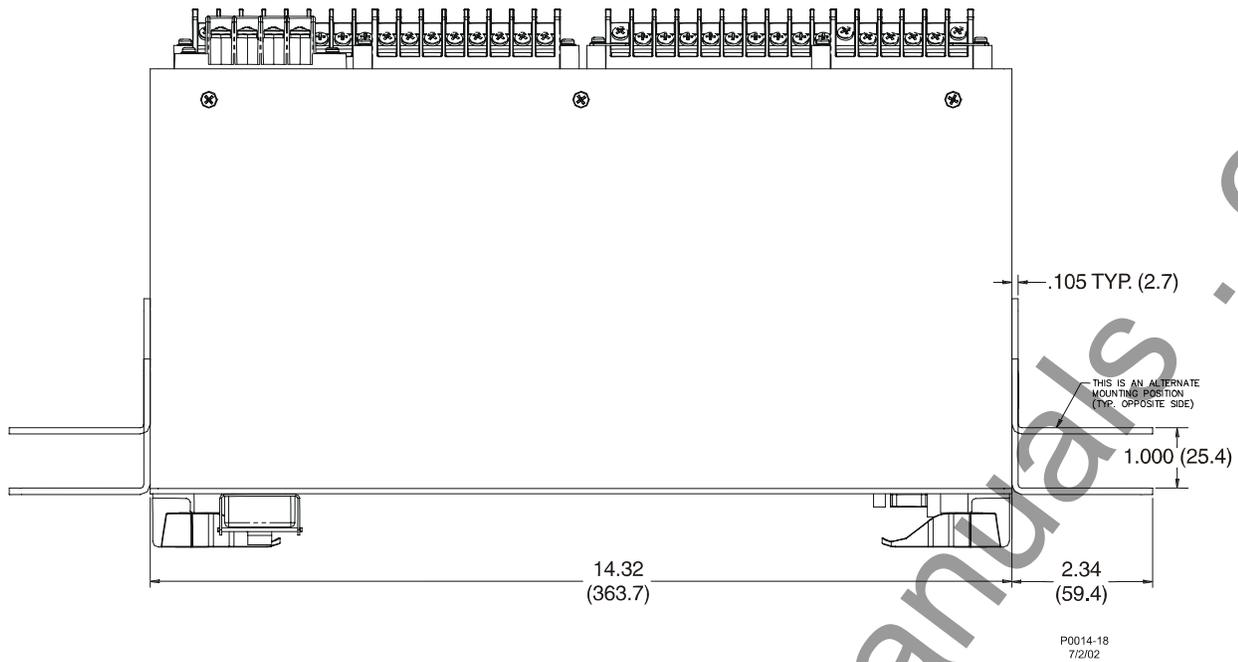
19-inch Rack Mount, Top View, Overall Dimensions
